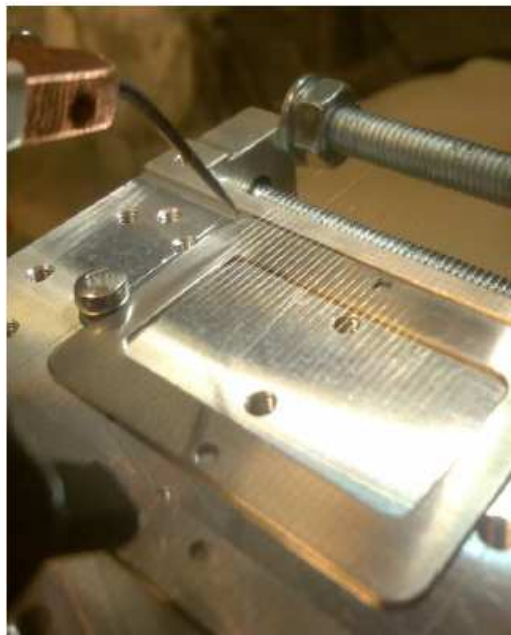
Electrostatic mirror grid: Spot-welded 25 μm diameter Au plated W wire; wire-to-wire distance 1 mm. [15]
